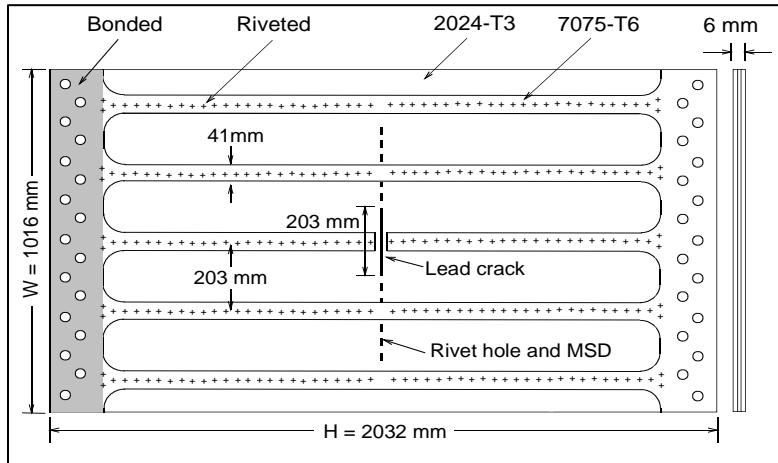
Wide Stiffened Panel With Single Lead Crack and Multiple-Site Damage.
